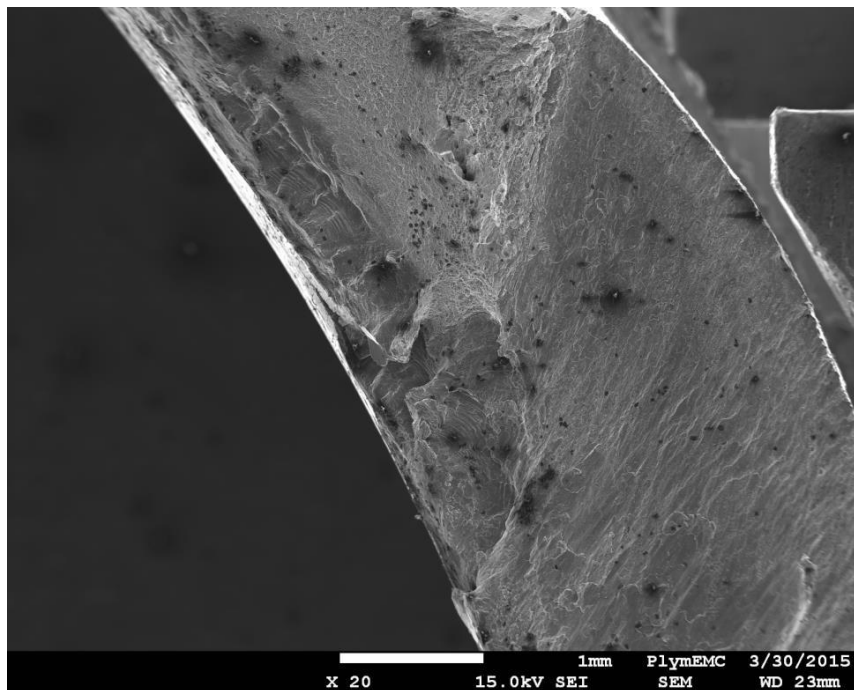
Clear evidence of initiation of the primary fatigue crack from the outer edge of specimen IPh2 can be seen at the upper right hand corner in this image.
